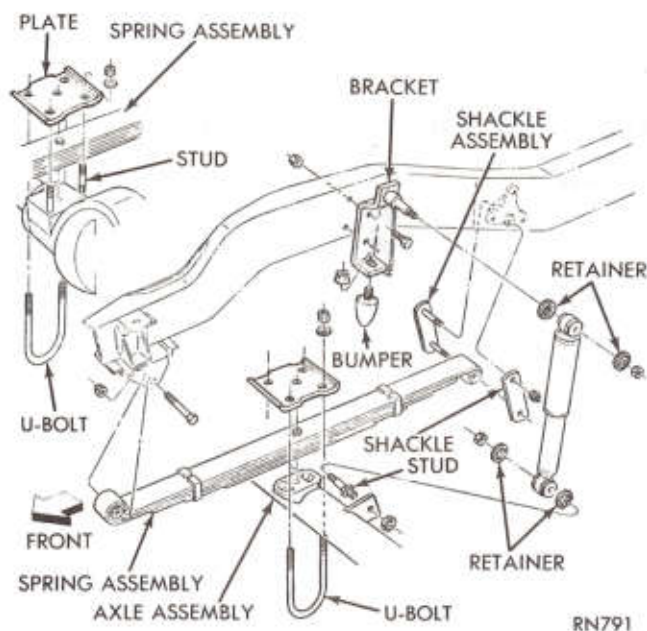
Front Suspension (Spicer 60 Axle) W350
